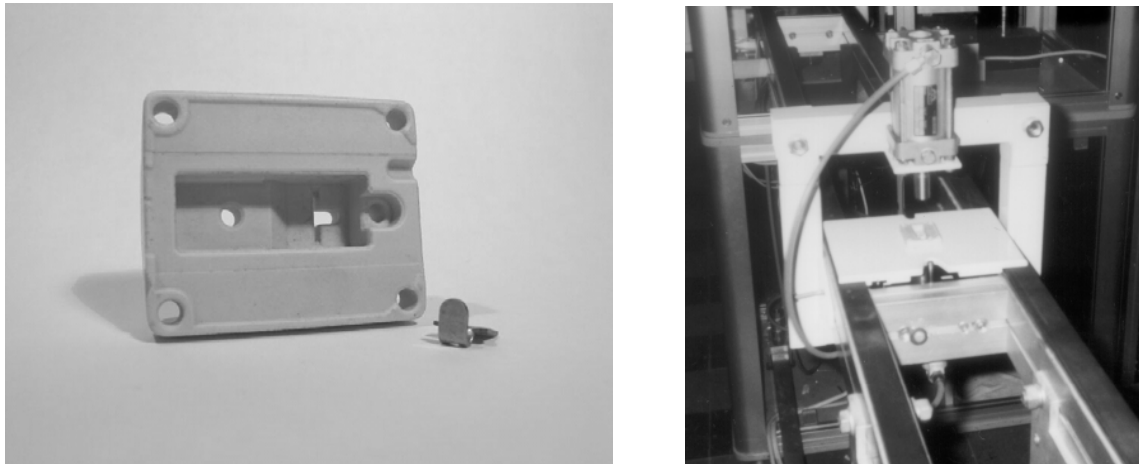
The parts to be assembled (left) and the fixture for upsetting operation
